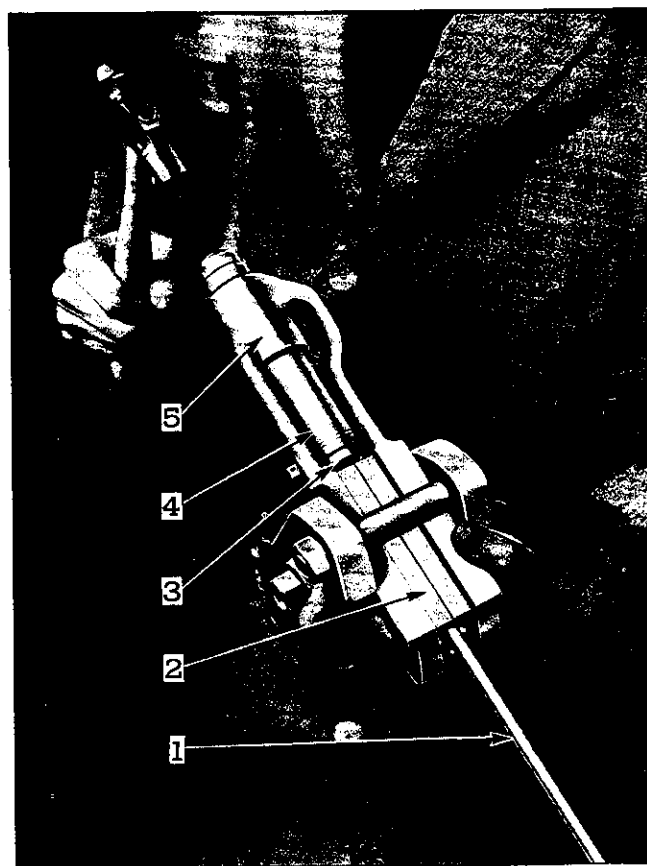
Flaring Tubing with Tool Supported by Hand.
